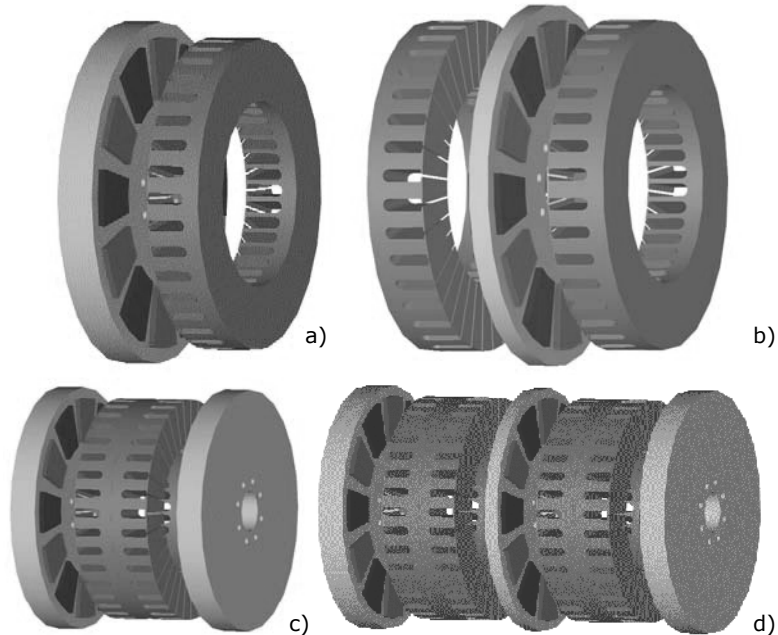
AFPM motor configurations: a) single-sided, b) double-sided with internal rotor, c) double-sided with external rotor, d) multi stack [12].
